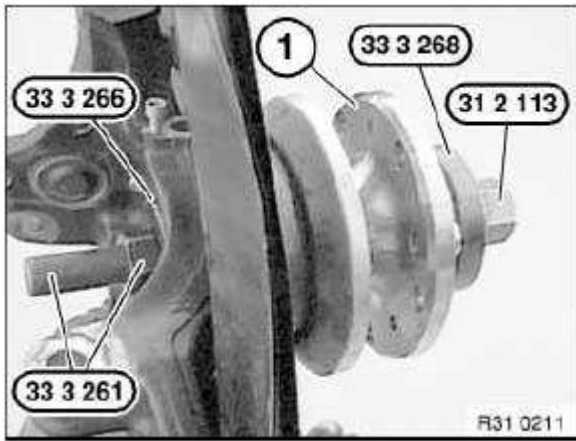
Drive Flange With Special Tools (33 3 261), (33 3 266) And (31 2 113)
